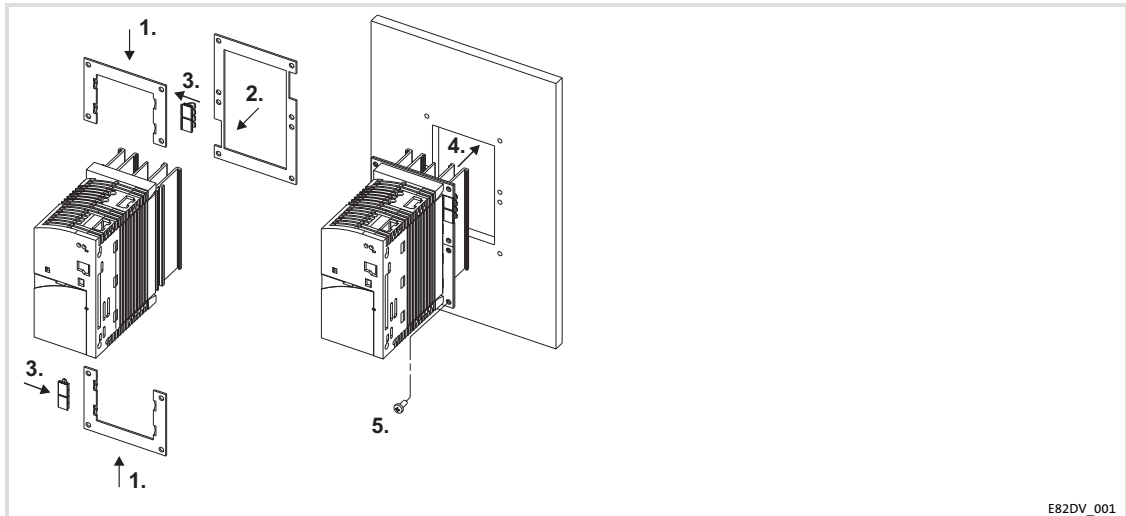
Thermally separated mounting 0.25 ... 0.75 kW
